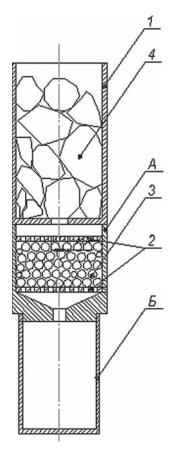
Filtering equipment assembled: 1 - crucible, 2 - grids, top and bottom, 3 - filtering elements, 4 - charge, 5-metal receiver
